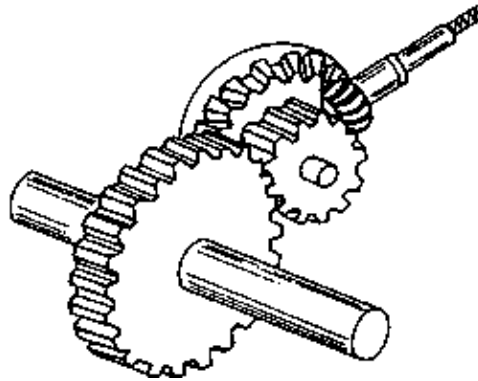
/7 Combination of bevel-gear drive and spur gear pair
